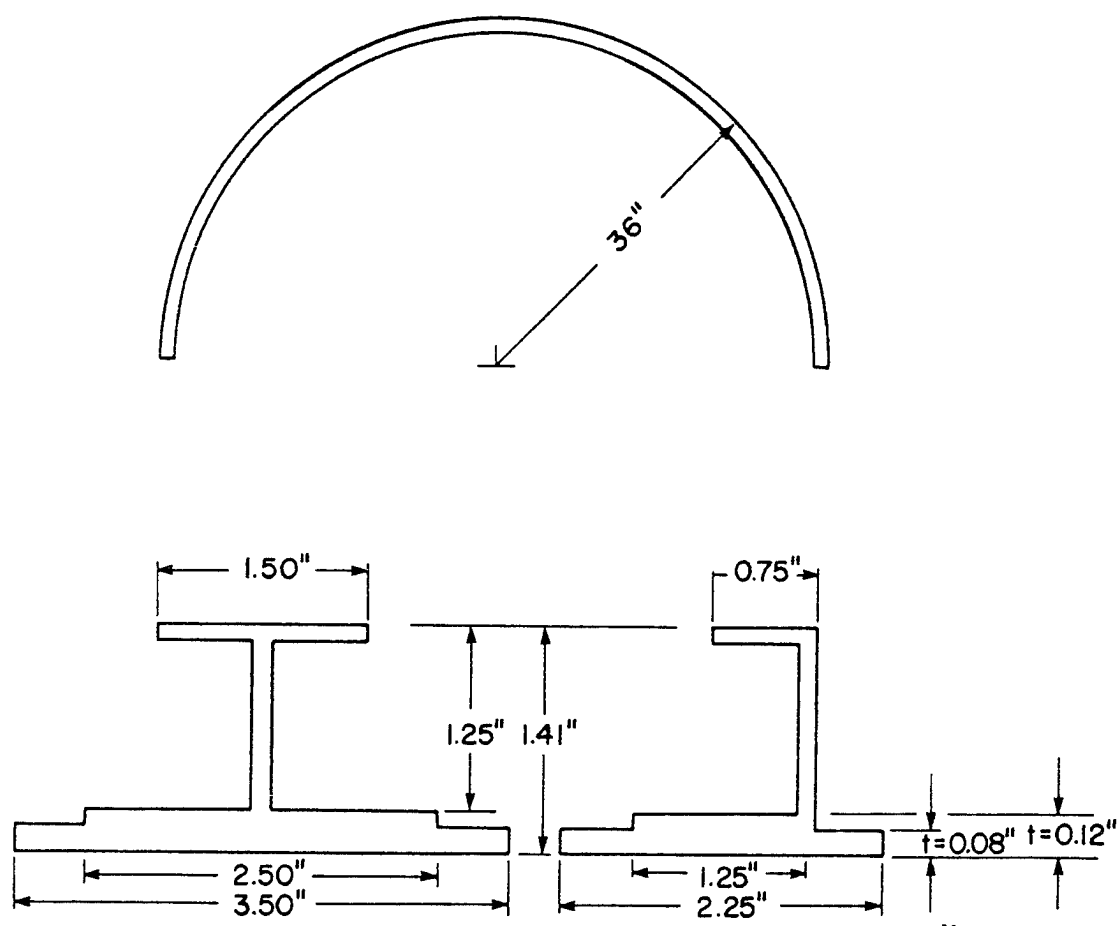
Specimen dimensions: The radial and cross-sectional dimensions of the tests specimens are presented in two views.
